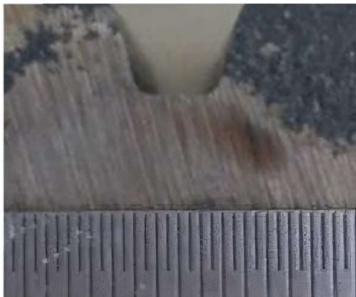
Groove design trapezoidal prism with a width of 7 mm
